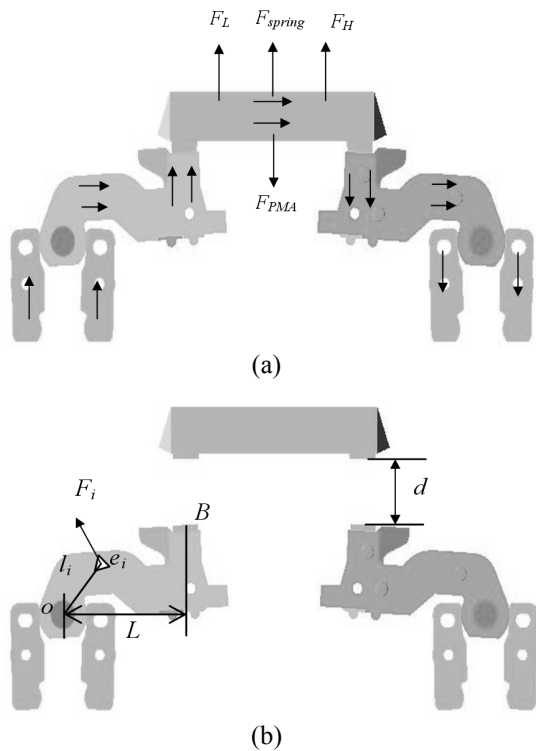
The static contact and movable contact position: (a) At the open position; (b) At the closed position
